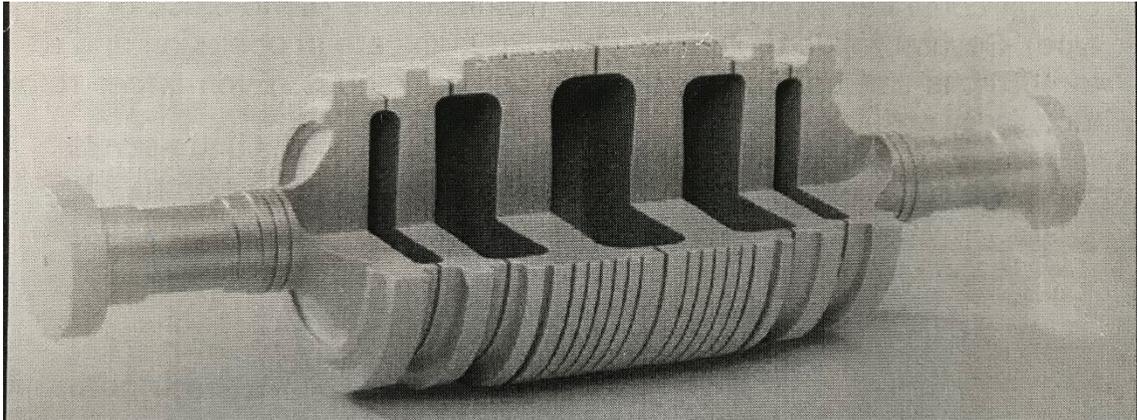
Welded rotor design (Courtesy GE)
